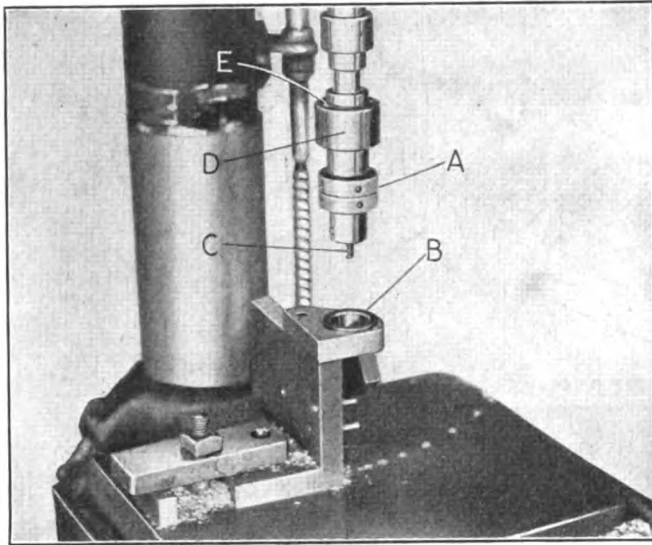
RECESSING TOOL IN A DRILLING MACHINE
